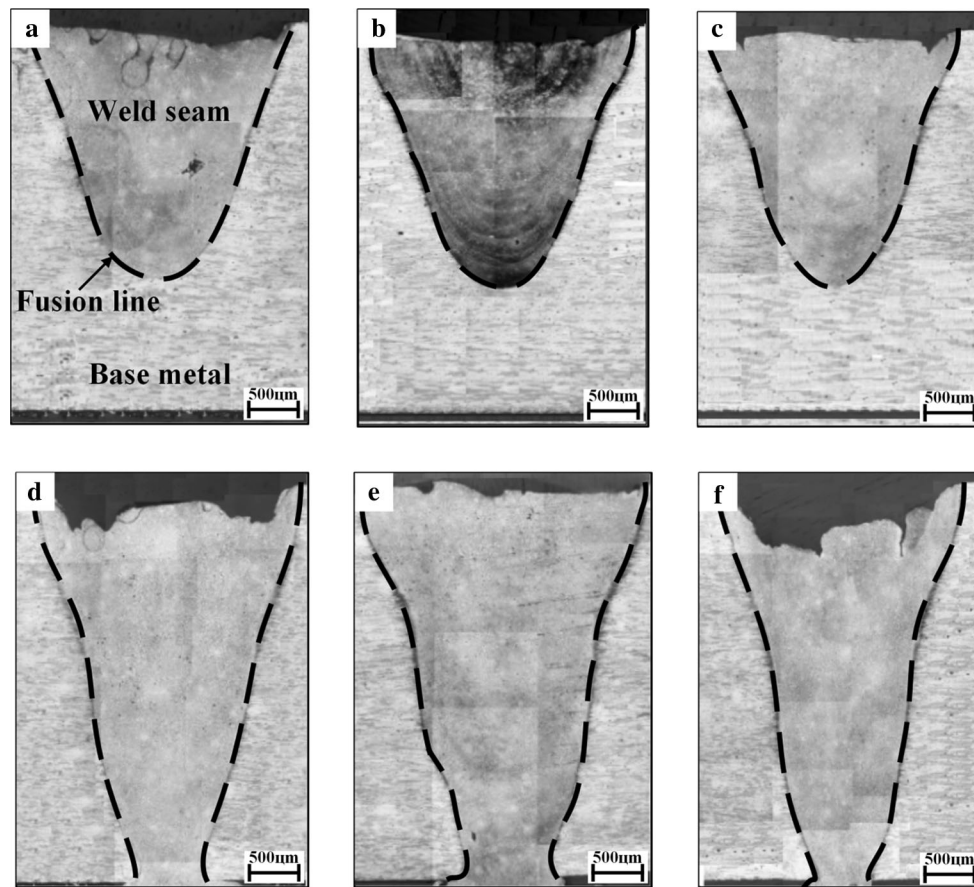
2024 aluminum alloy weld cross section morphology: a–f group A1–A6
